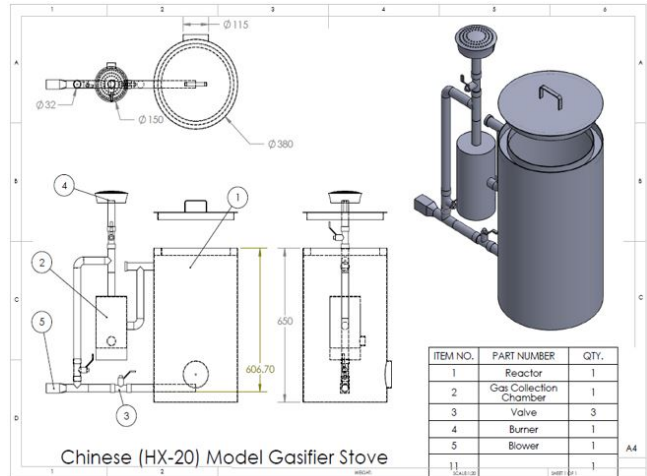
Assembly drawing of Chinese model (HX-20) gasifier stove
